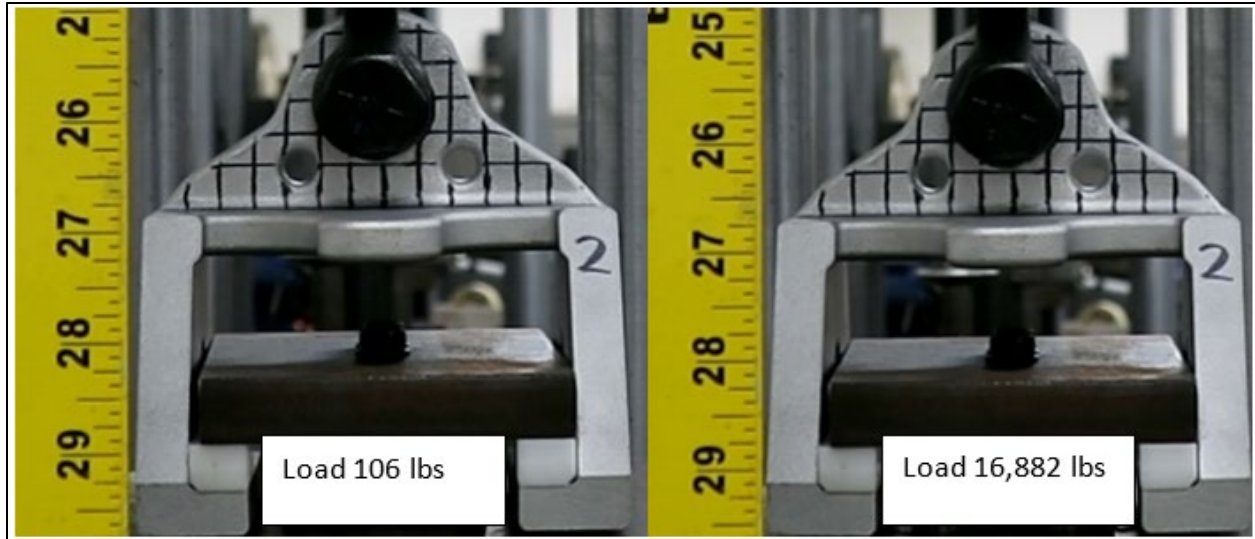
Frame capture of anchor piece 2 during testing at 106 lb and 16,882 lb load with no visible deformation.
